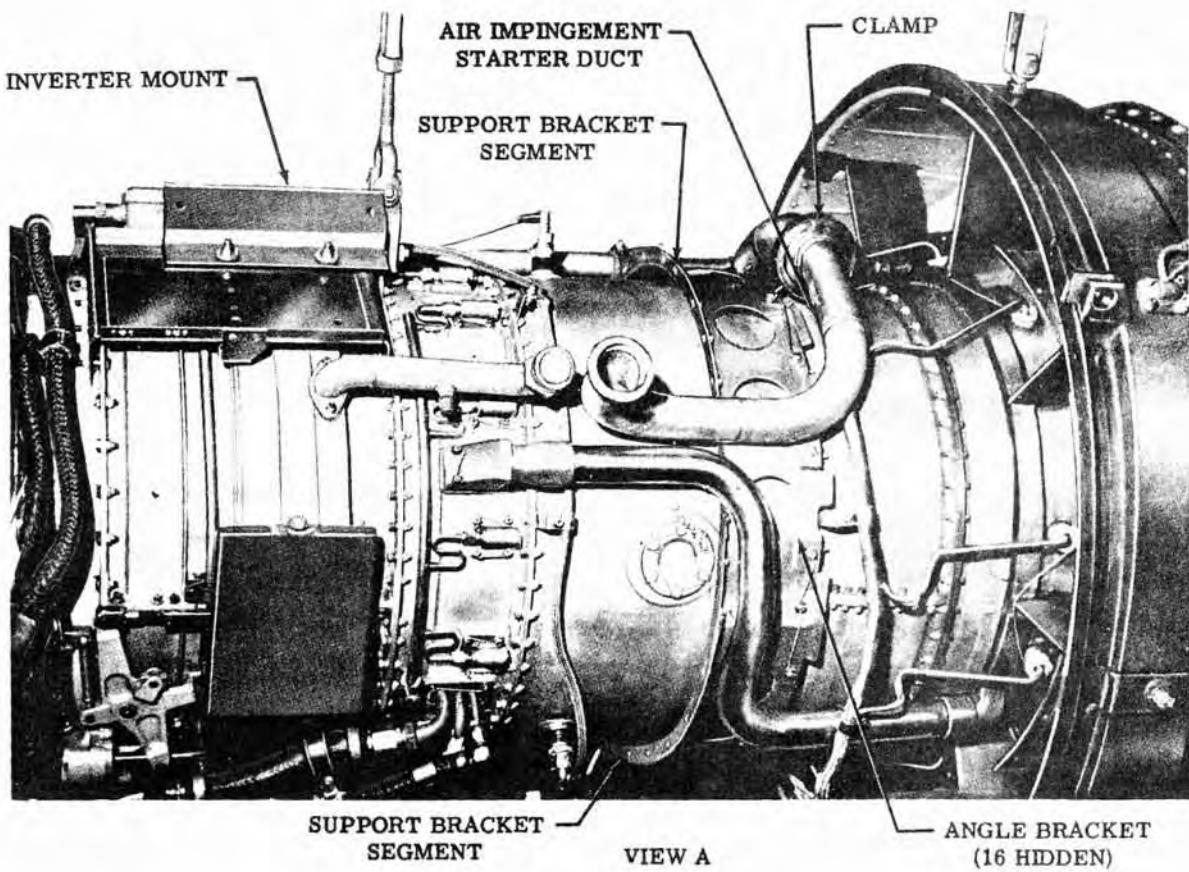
Support Ring and Inner Bellmouth Assembly
